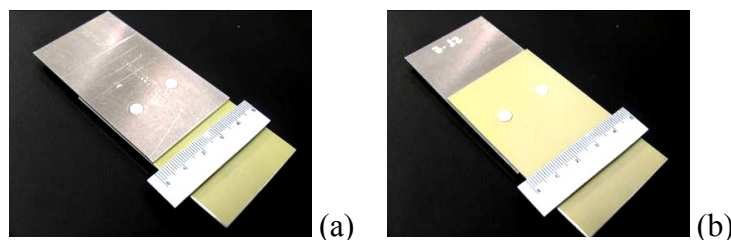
Dissimilar riveted joints: (a) Al-Gl; (b) Gl-Al.
